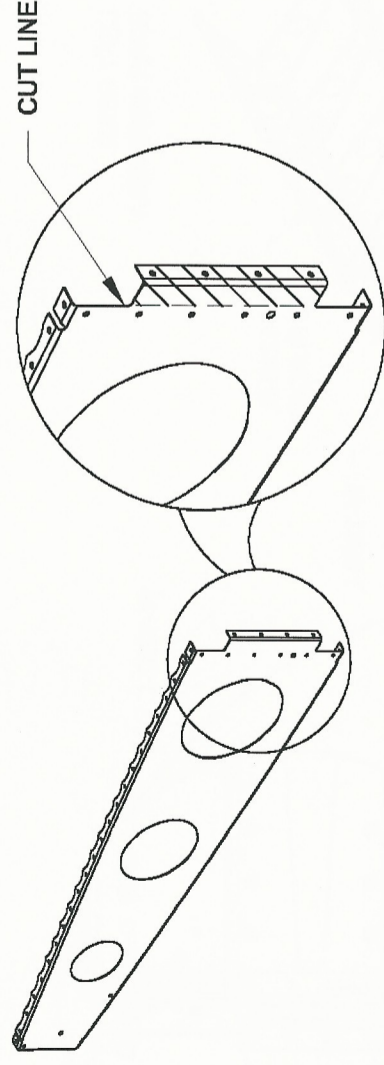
W-1210 MAIN RIB FWD FLANGE TRIM (LEFT SHOWN)
